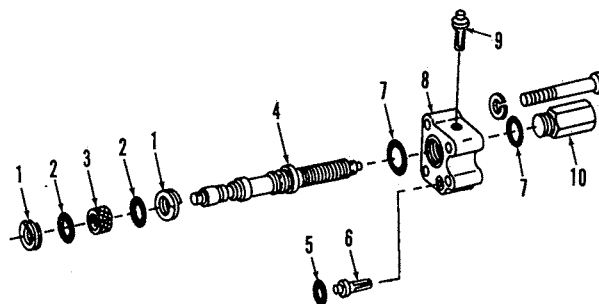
Exploded view of load control valve used on Models 4650 and 4850.
